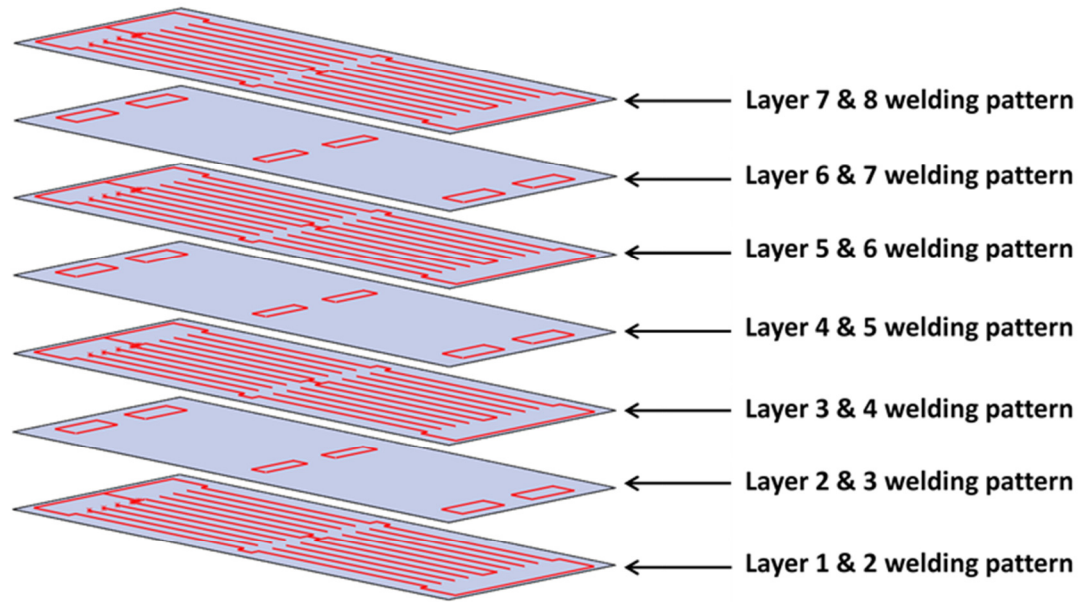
Welding pattern in the stacked polymer heat exchanger
